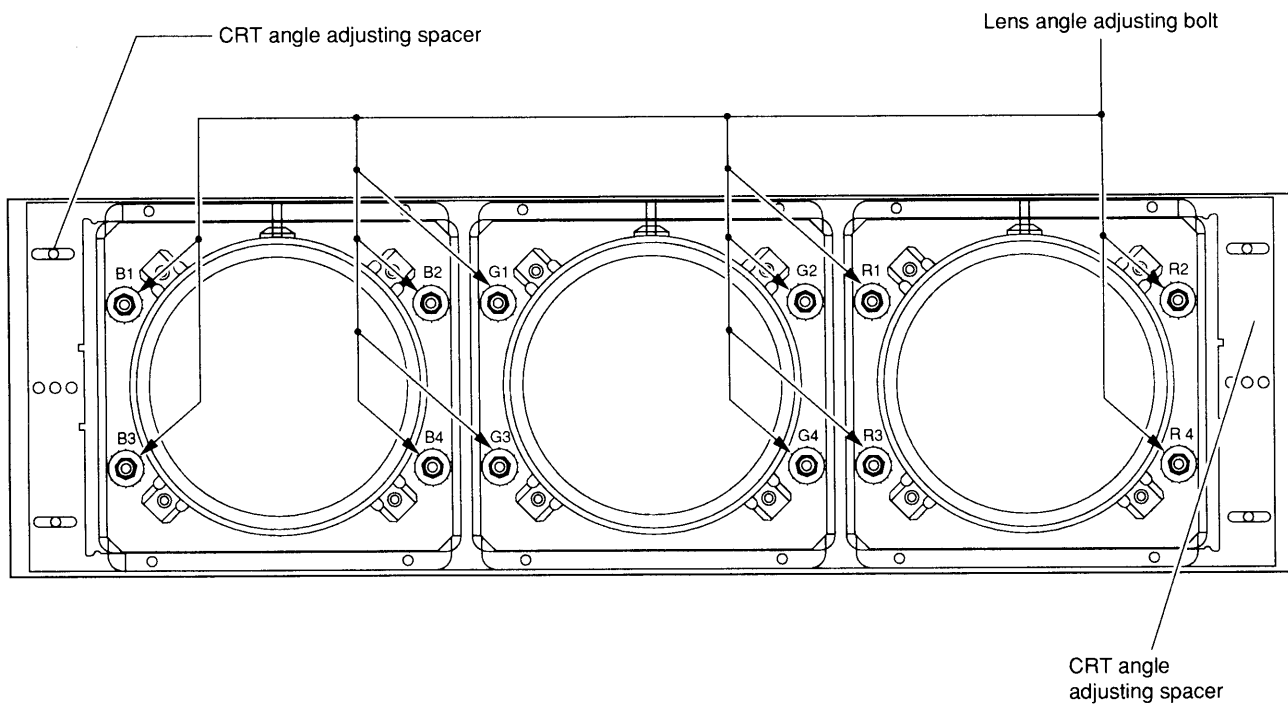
Adjustment mechanism of CRT angle and lens angle
